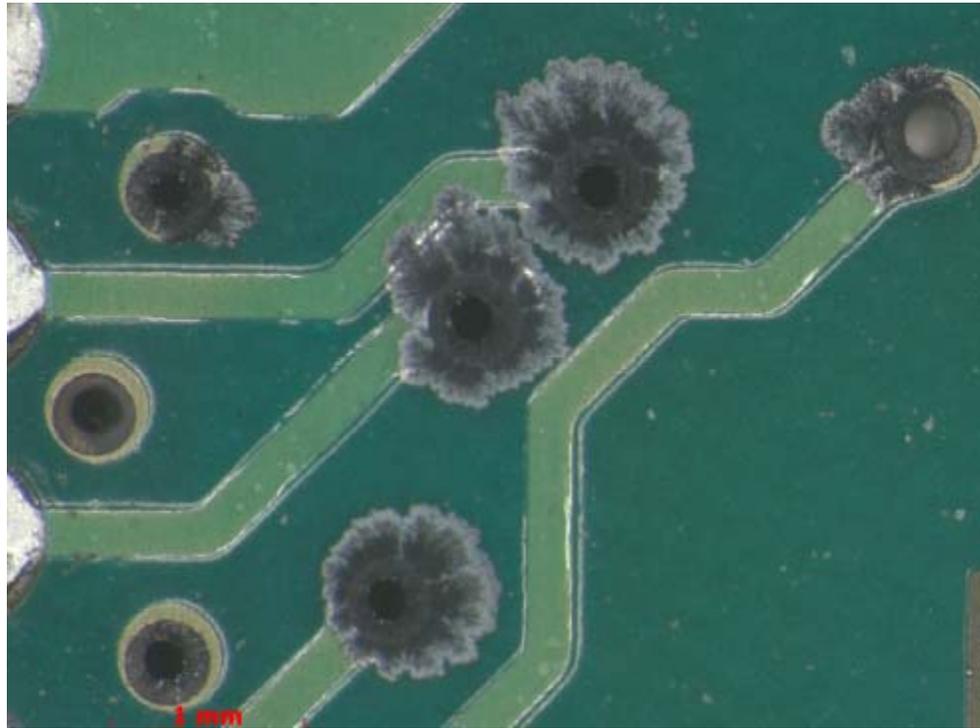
Corrosion on an immersion-silver plated PWB (courtesy HP)
